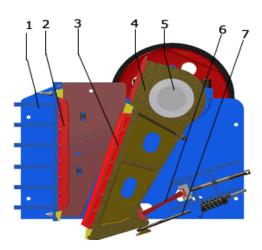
Sectional view of a jaw crusher (Stonecrusher.org, 2011)(1. Frame; 2. Fixed Jaw; 3. Moving Jaw Plate; 4. Move Jaw; 5. Eccentric Shaft; 6. Toggle Plate; 7. Adjusting Toggle Seat)
